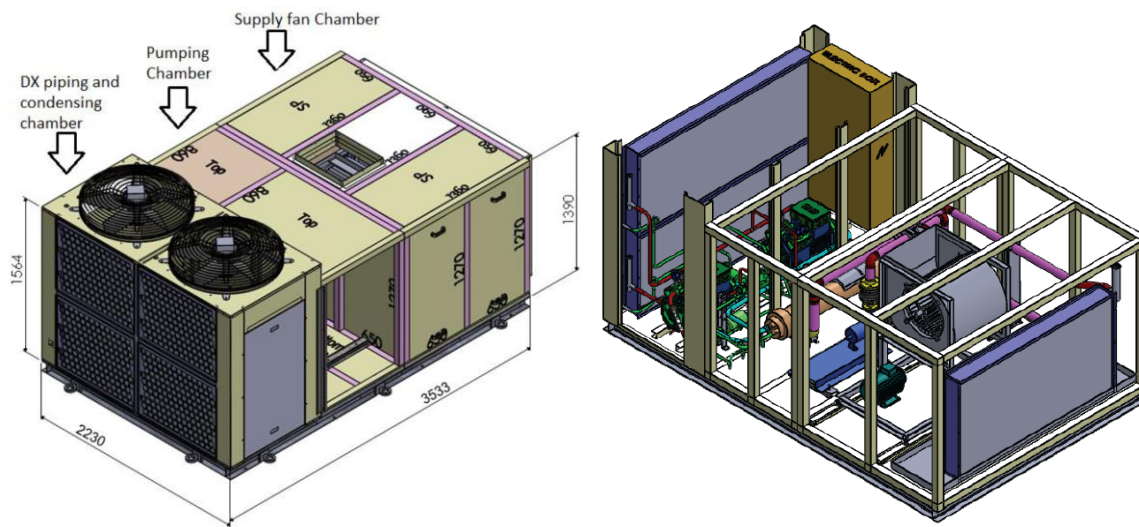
Schematic of 70 kW Prototype Air-Cooled Chiller
